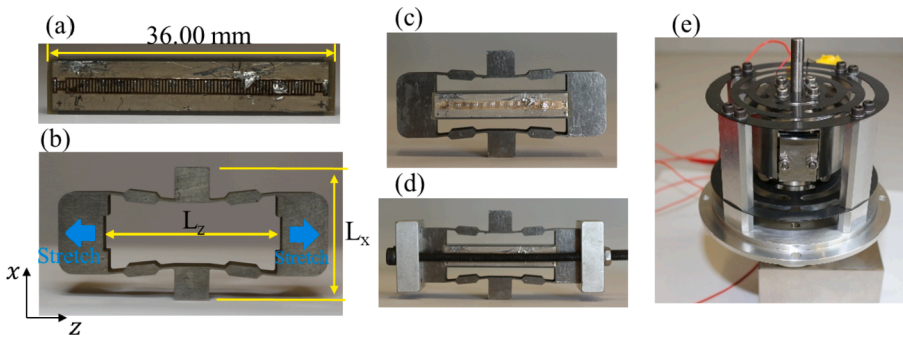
Fabrication of the PSEH: (a) the PZT stack; (b) the mechanical transformer manufactured by electrical discharge machining; (c) the PZT stack and the mechanical transformer assembled with an 'interference fit'; (d) pre-stressing caps and bolts were installed and tightened; (e) the PSEH with the proof mass and plate springs installed.
